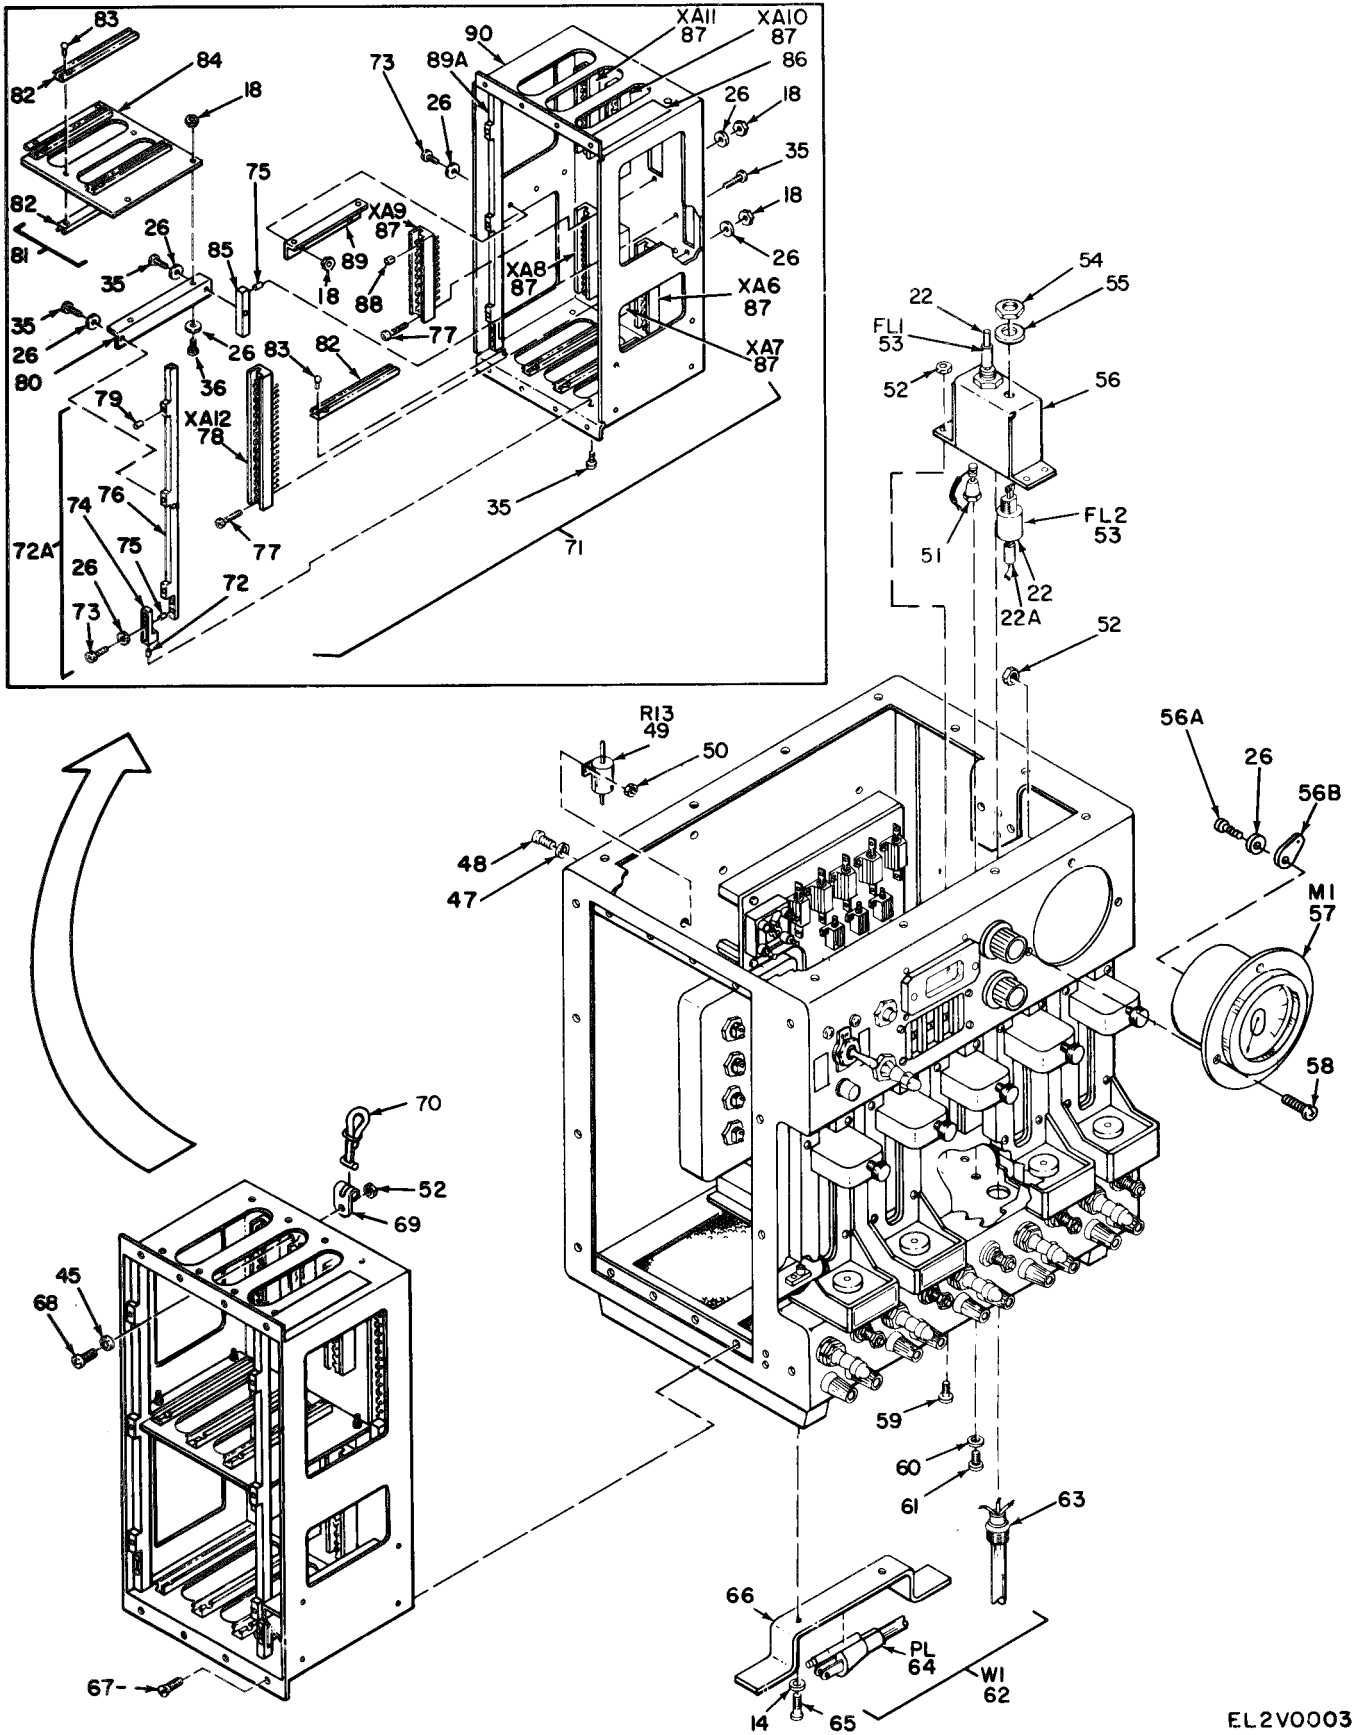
Battery Charger Assembly (Sheet 2 of 5).
